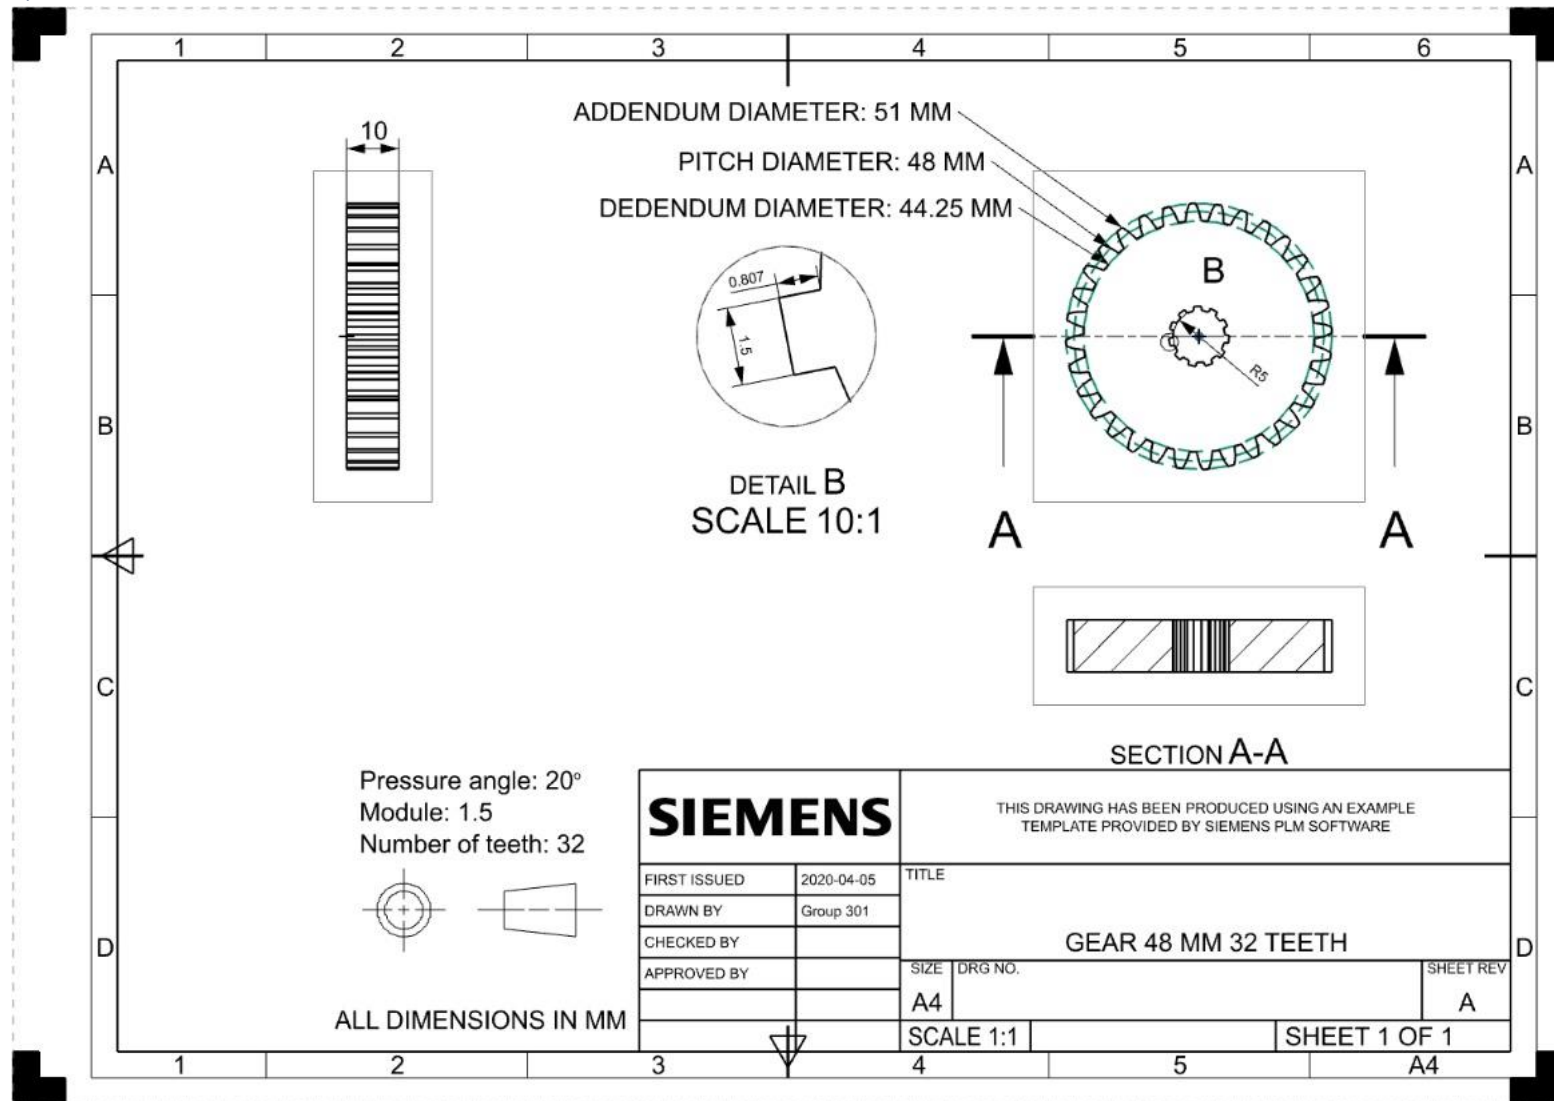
Detailed drawing of the 48.0 mm pitch diameter gear.
